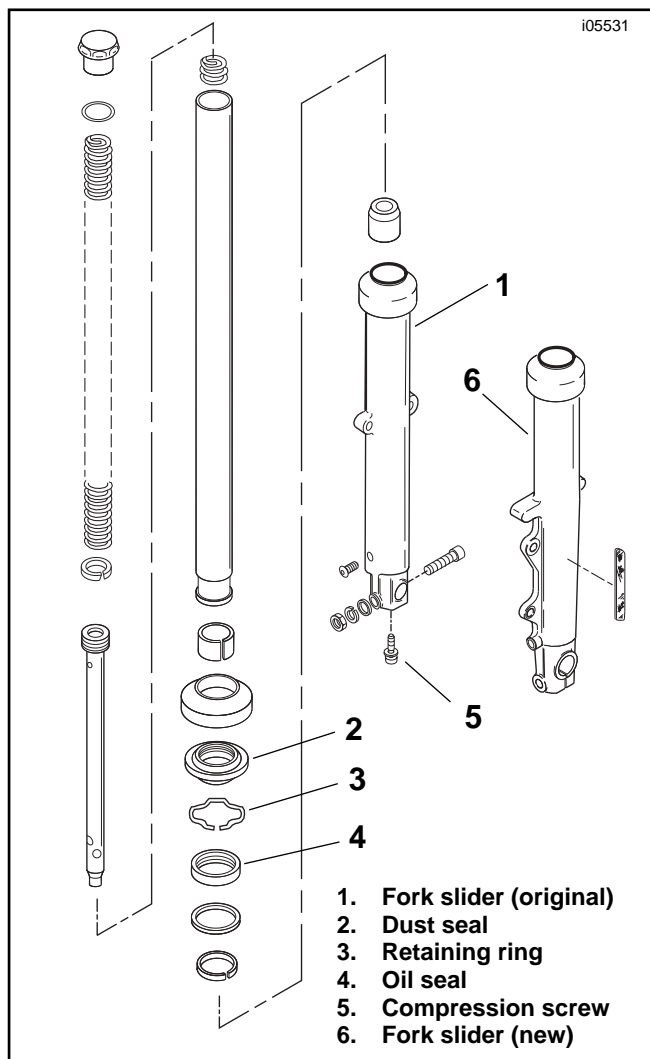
Right-Side Front Fork Slider-and-Tube Assembly
